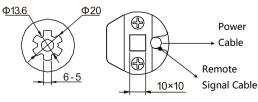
Dimensions—Motor Bottom View (Unit: mm)
